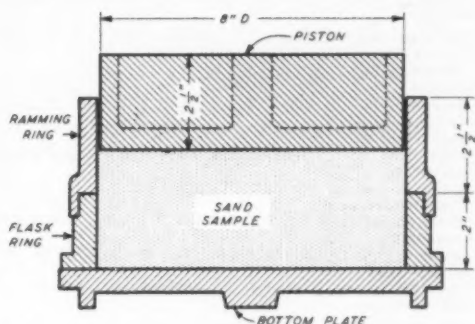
Drawing of the sand ramming equipment used to produce test molds of the same hardness and density.
